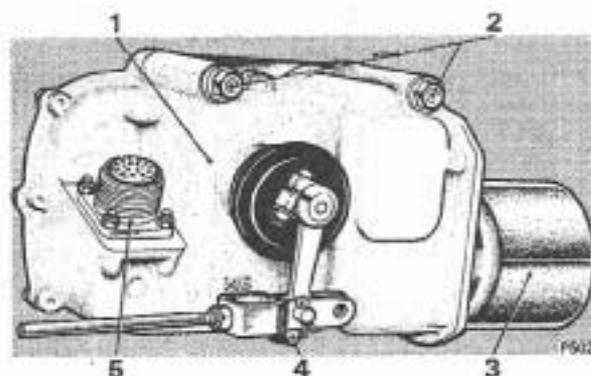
ELECTRIC GEARCHANGE ACTUATOR
